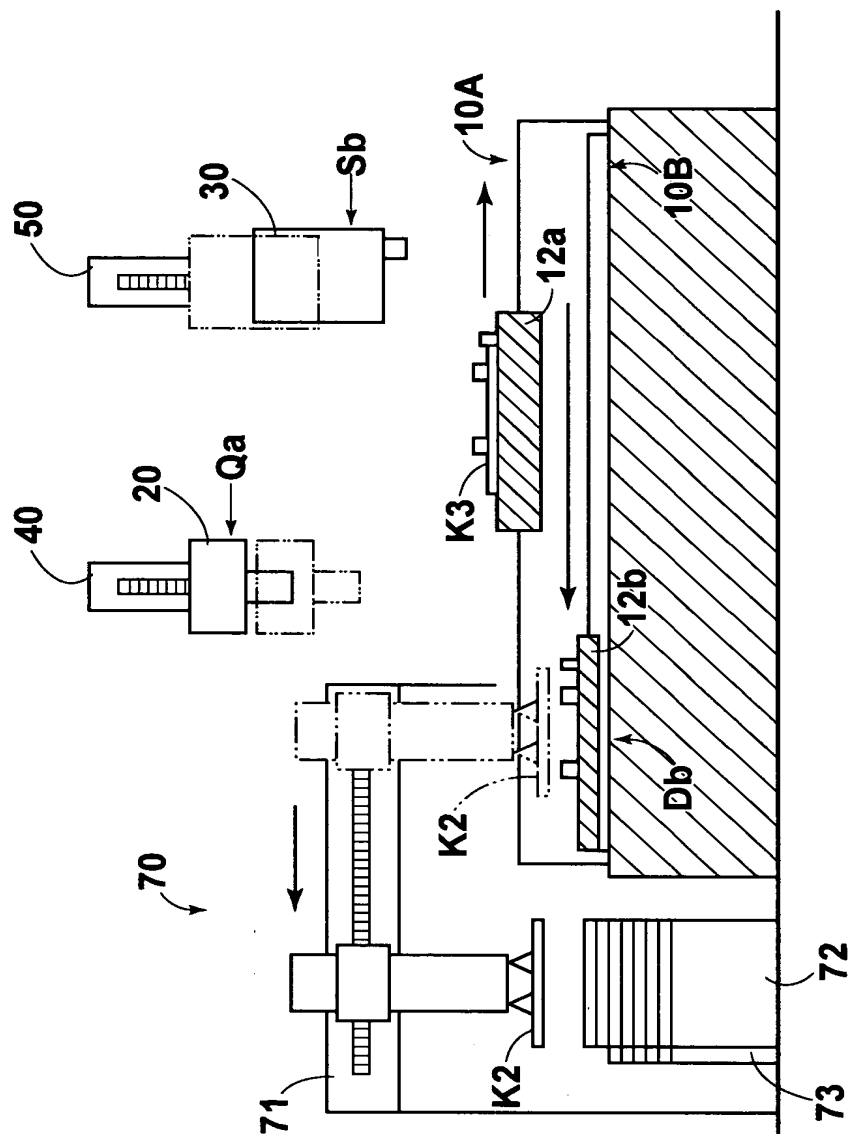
is a schematic diagram of a mechanical assembly. The assembly includes a base 70 with a vertical shaft 71 and a horizontal shaft 72. A motor 73 is connected to the horizontal shaft. A series of gears and shafts are shown, including components 20, 30, 40, 50, 10A, 10B, 12a, 12b, K3, K4, and Db. Arrows indicate the direction of rotation and movement.
